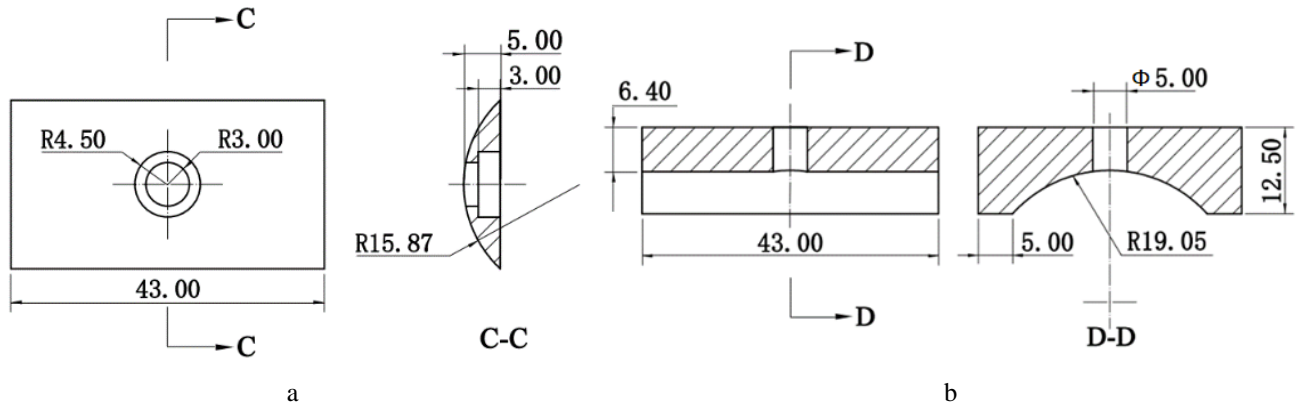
Dimensions of grip inserts (unit: mm): a) internal insert; b) external insert
